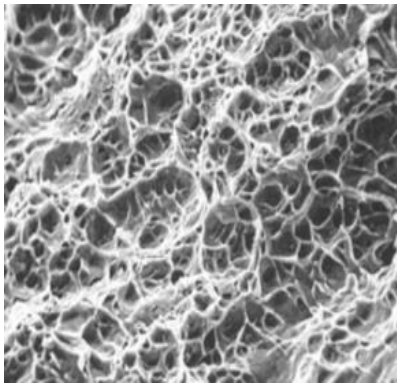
Ductile fracture showing dimples. Picture taken from Callister[12].
